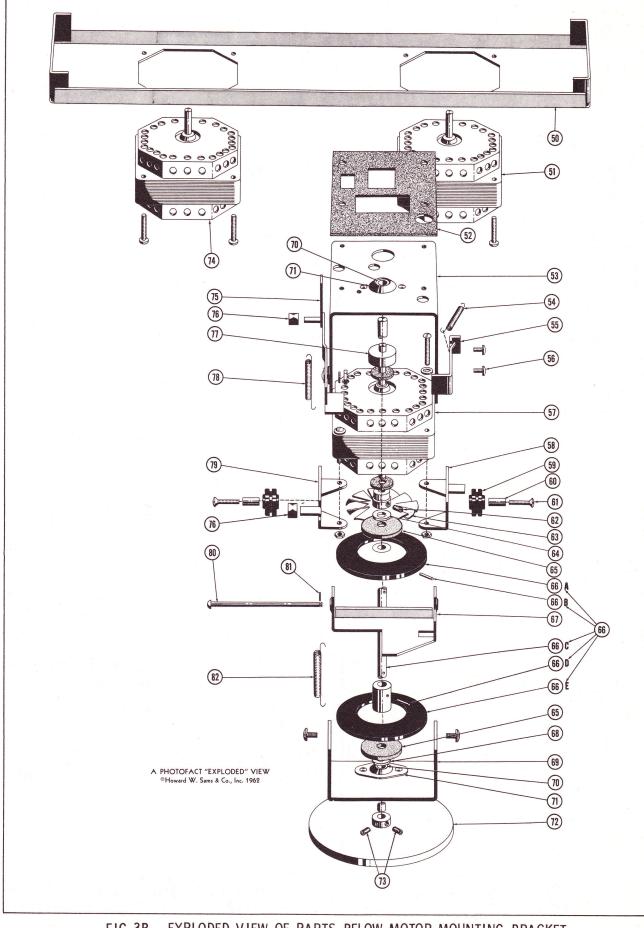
B EXPLODED VIEW OF PARTS BELOW MOTOR MOUNTING BRACKET
